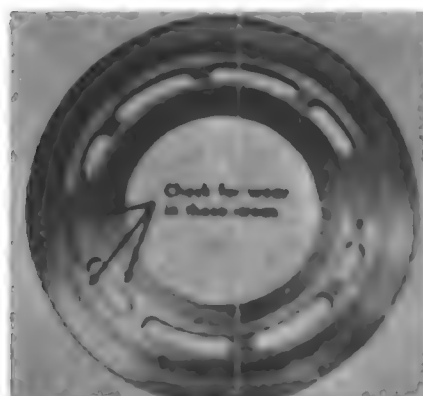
Inspect steel valve plates for wear or scoring in the areas shown.
